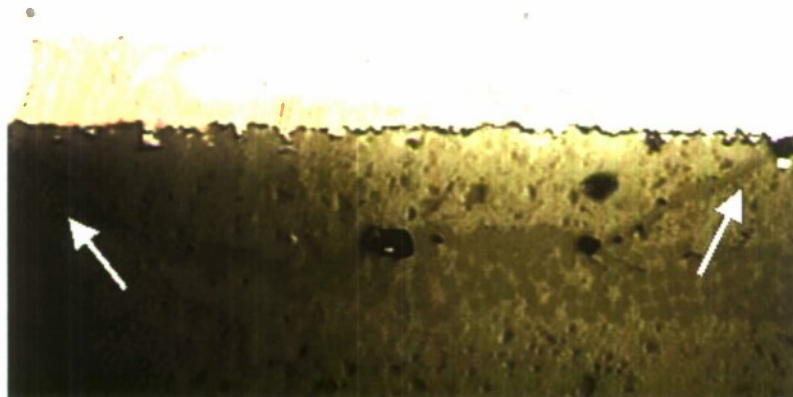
Cracked resin under the board side pad (dark line), edge bonded
